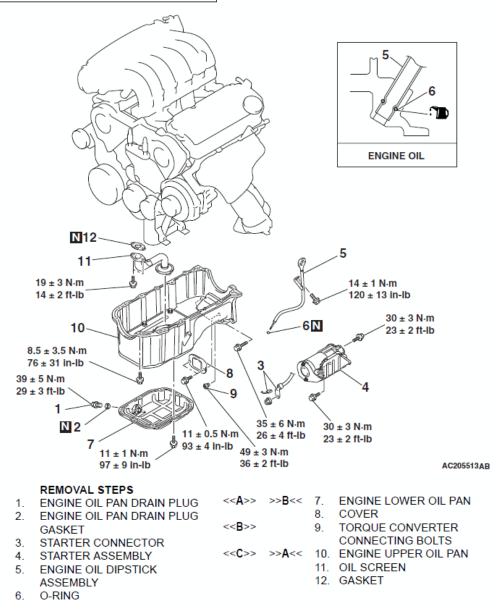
Oil Pan And Oil Screen Components With Torque Specifications Courtesy of MITSUBISHI MOTOR SALES OF AMERICA.
